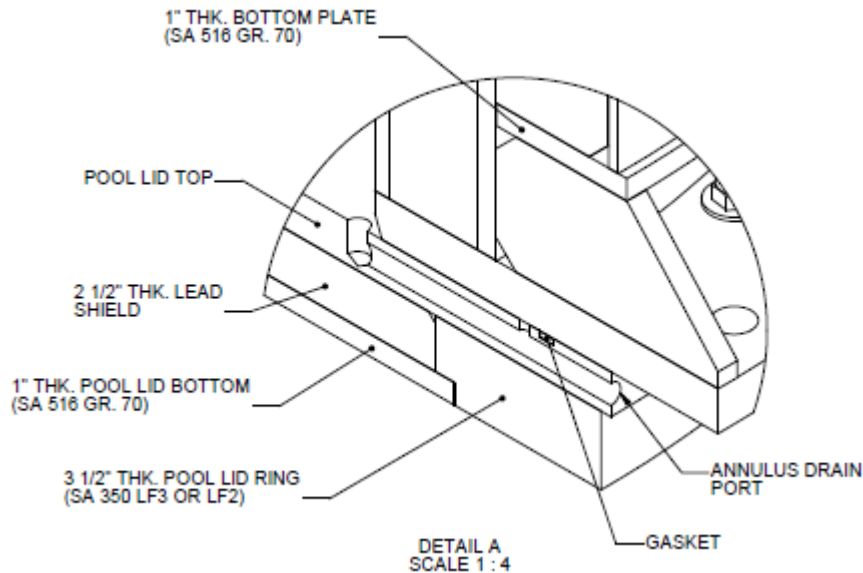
HI-TRAC 125D Lower Assembly Detail^{25,26}
